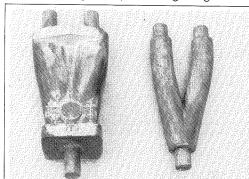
The manifold pattern and 'core pattern or 'pair of leas' representing the manifold ports. With the core pattern made this was then used to make a 'core mould' in GRP, which could be split in half, figs. 4 & 5. The GRP mould could
